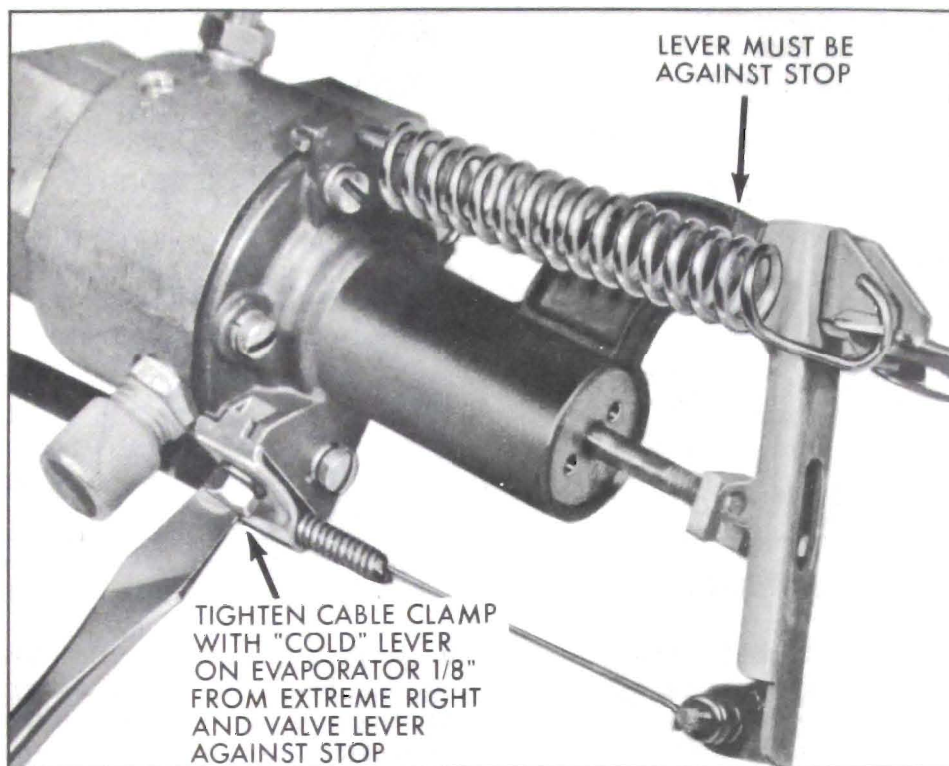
Suction Throttle Valve Control Wire Adjustment
